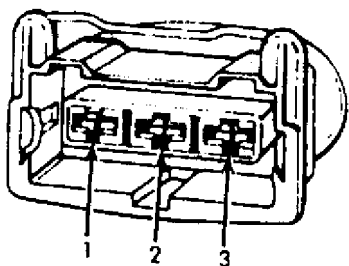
Terminal Pins Idle Stabilizer Valve Connector ID
